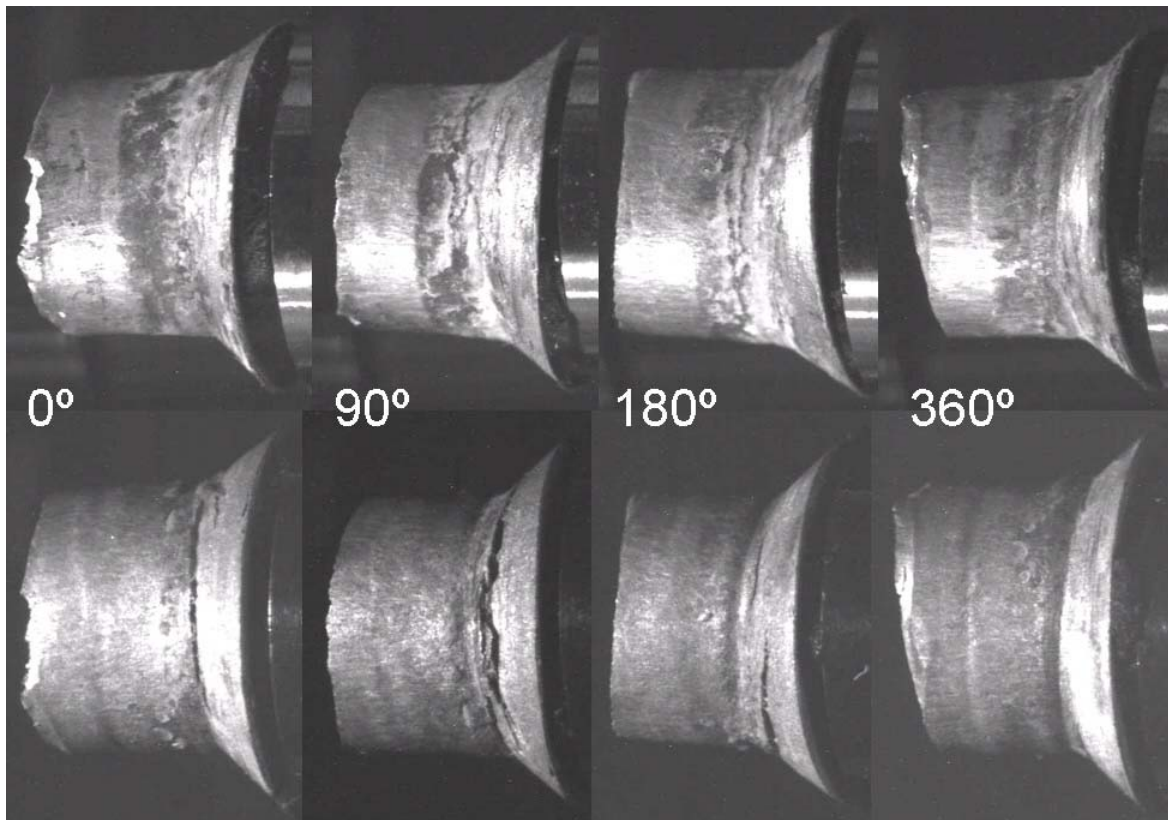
Corrosion Pillowing Induced Cracks in a Rivet (Top: As removed; Bottom: Cleaned).
